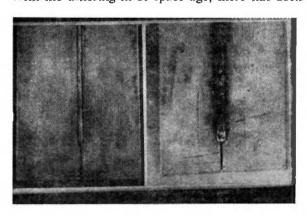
Production weld in 1/8" stainless steel sheet with hot-wire TIG Process
